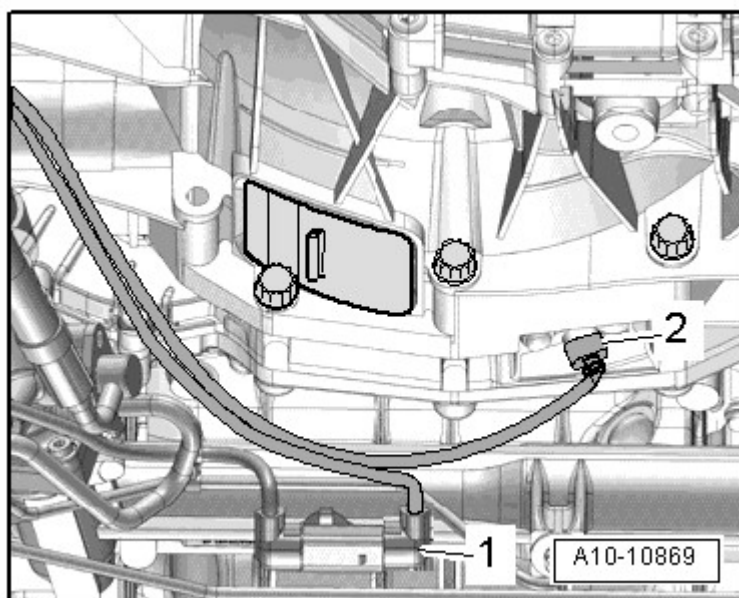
Disconnecting Engine Speed (RPM) Sensor Connector
